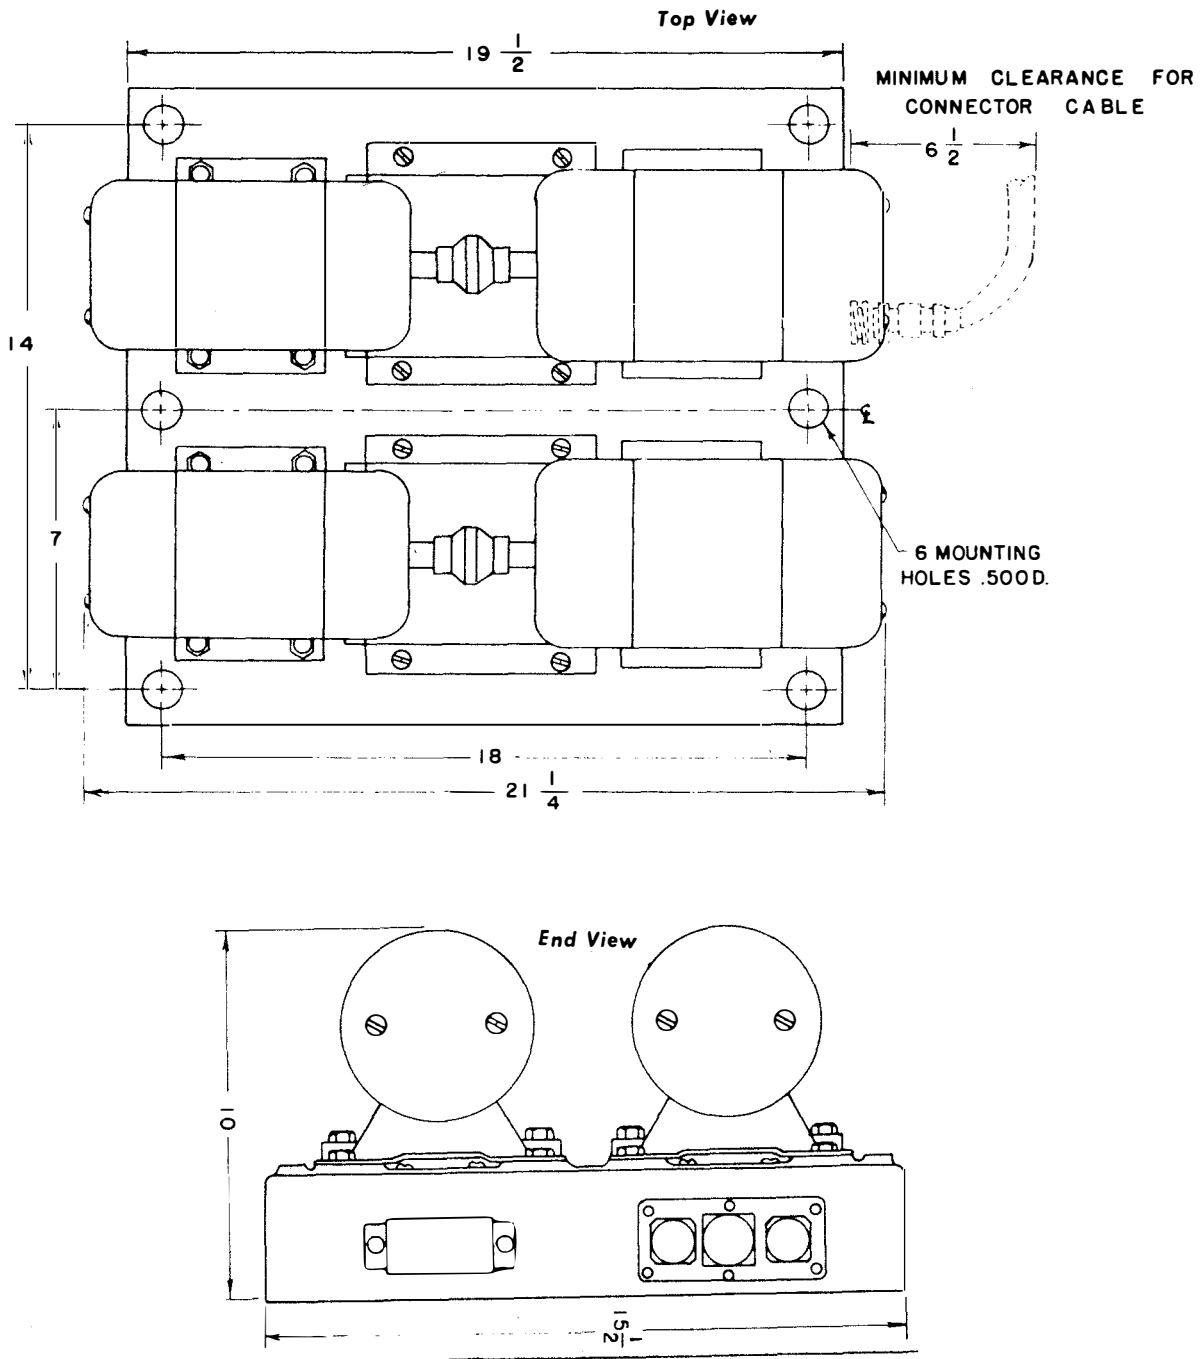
Type -211100 and -21827-A Motor Generator Power Units Installation Diagram.
